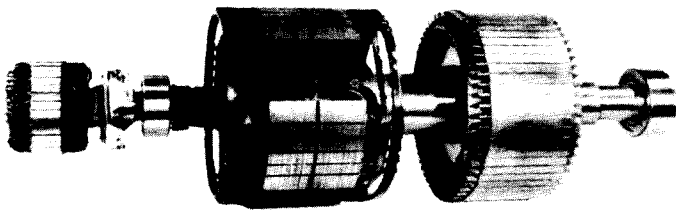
Motor - Generator Rotor, Brushless Exciter Armature Assembly
